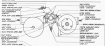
CRANK AND CONNECTING ROD ASSEMBLY
